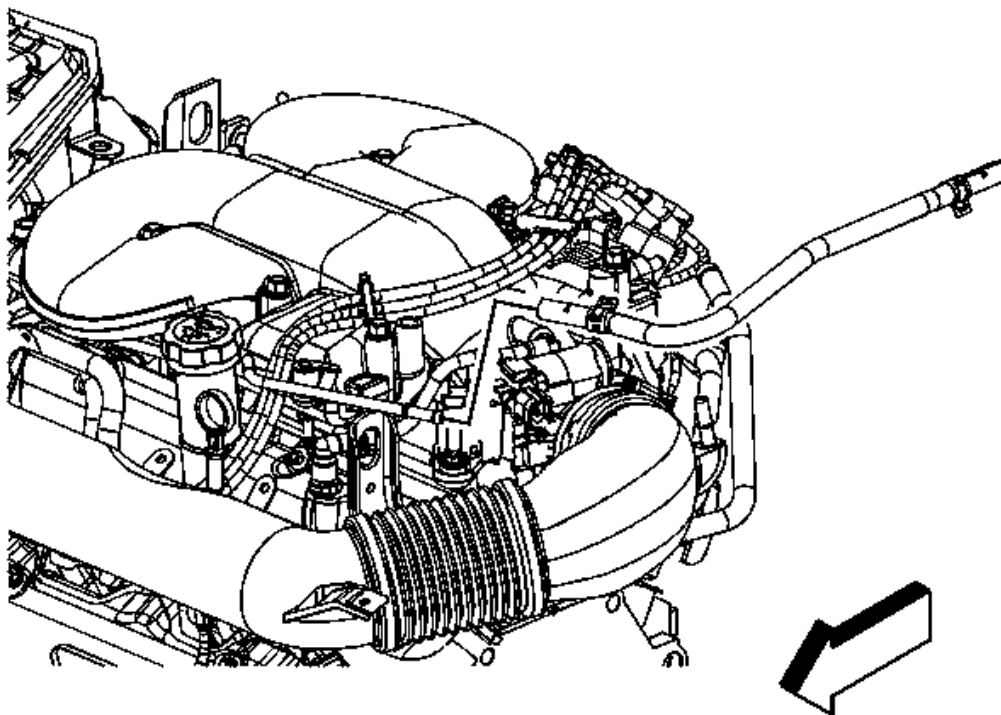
Radiator Surge Tank Inlet Hose & Inlet Pipe
